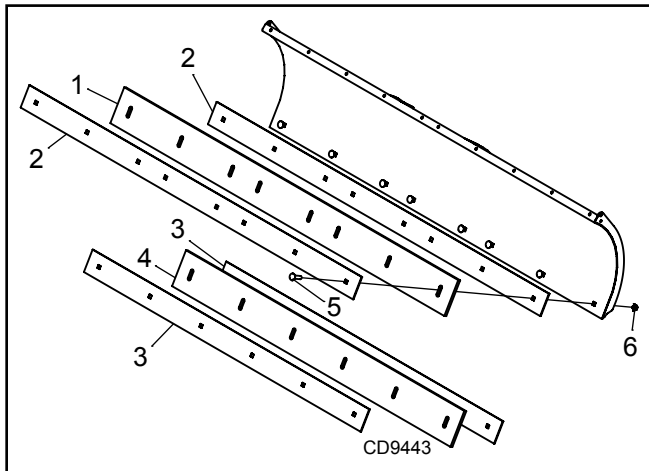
Loader Front Blade Urethane Cutting Edge Kit Installation
